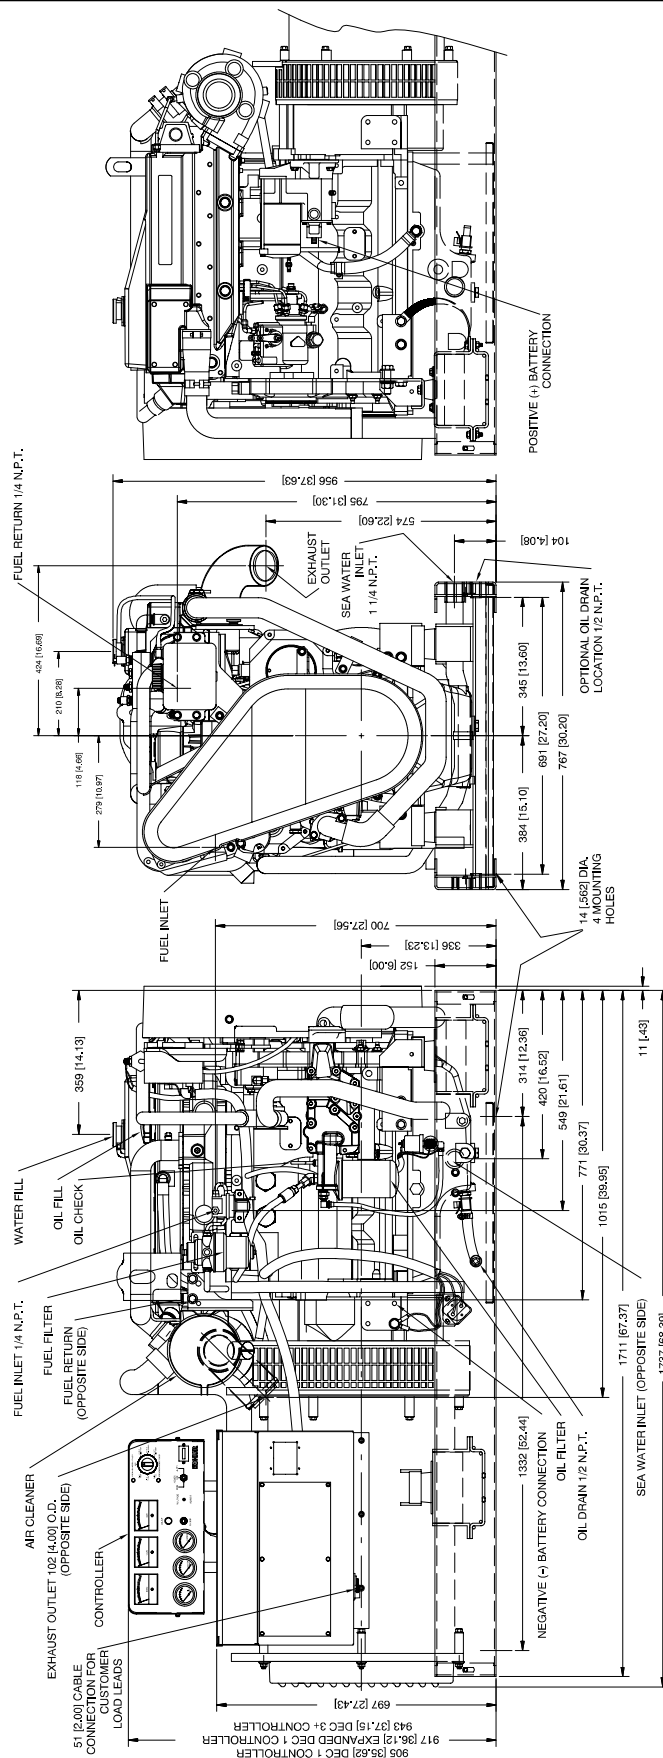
Dimension Drawing, 40EFOZ/50EOZ with Sound Shield
